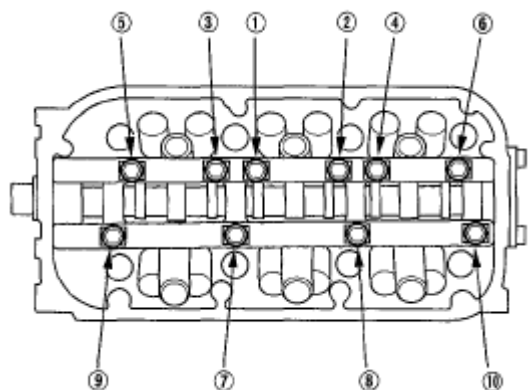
Identifying Tightening Sequence Of Rocker Arm Bolts - Front
